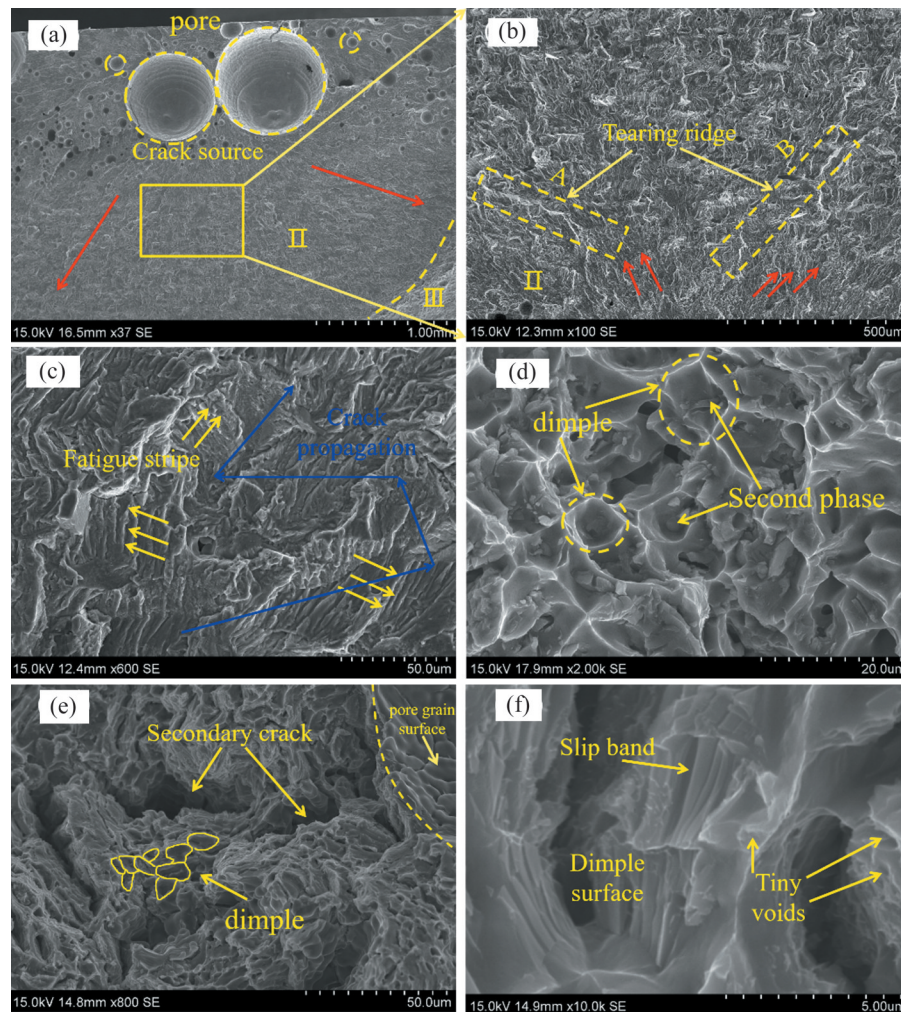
SEM images of fatigue fracture of welded joints: (a) Pores under weld surface; (b) Crack propagation zone; (c) Fatigue strip; (d) Instantaneous fracture zone; (e) Secondary crack; (f) Dimple
